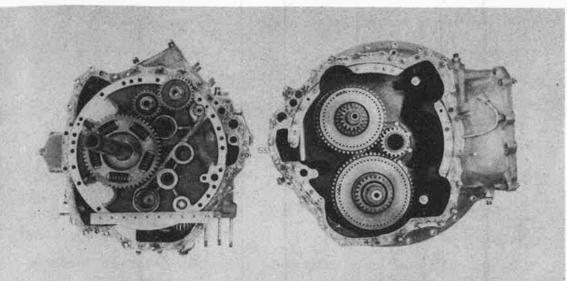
Supercharger Gearing and Clutch of Japanese Sakae-21 Aircraft Engine (CEE-2963).
